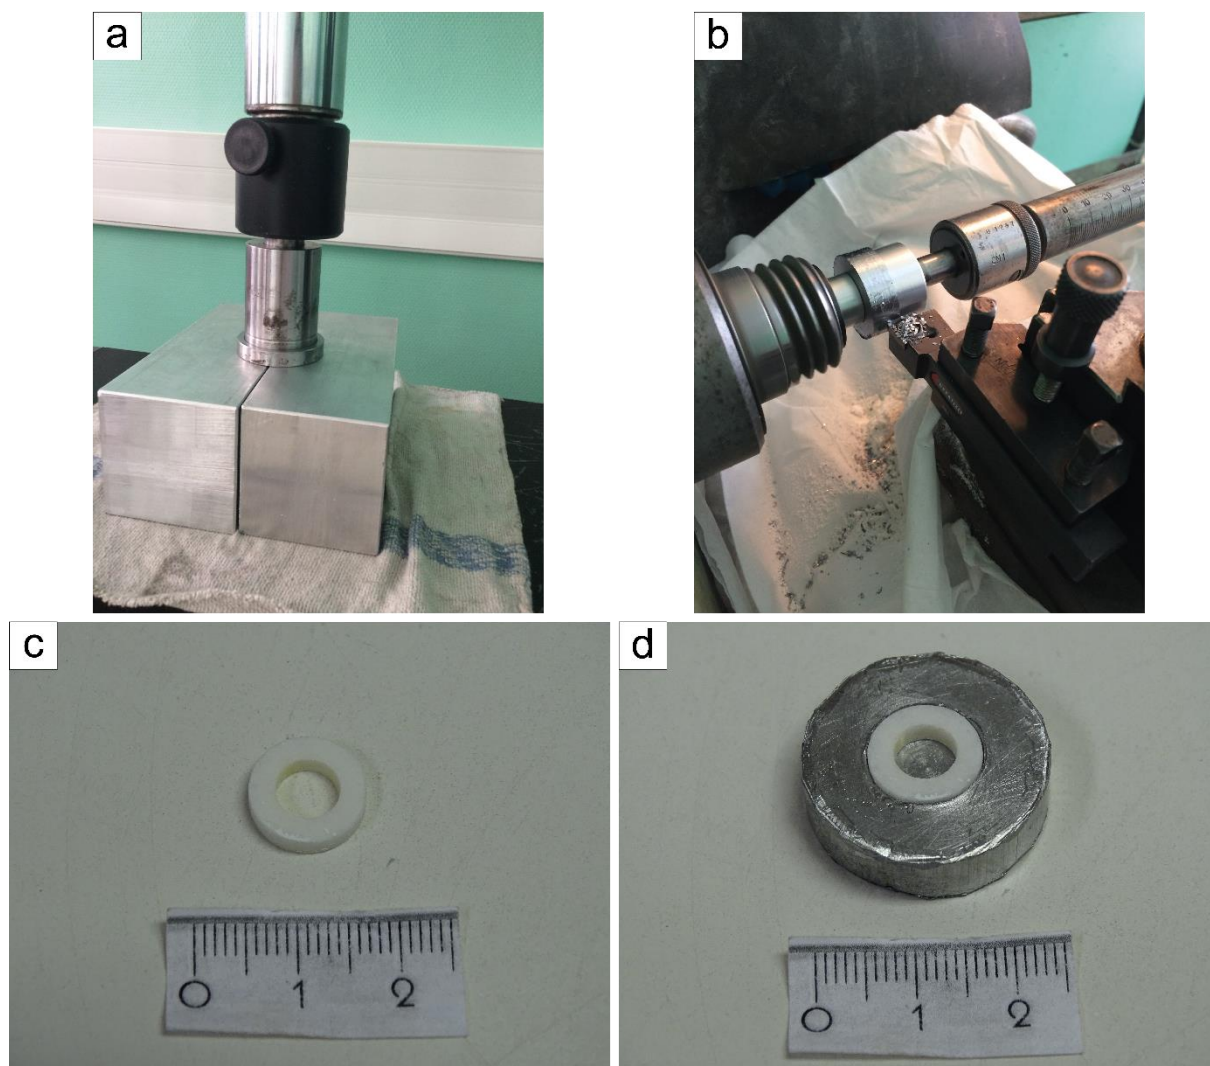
(a) The lead piece is made by pressing 50 g of melted lead at 4 tons during 30 seconds in a special mold. (b) The external diameter of the lead piece can be adjusted using the lathe machine and a special blade. (c) A salt ring is cut into an inner salt piece and is ground with sandpaper to the right thickness. (d) The salt ring is inserted at the bottom part of the lead piece. It will maintain the topmost part of the top piston in place.
